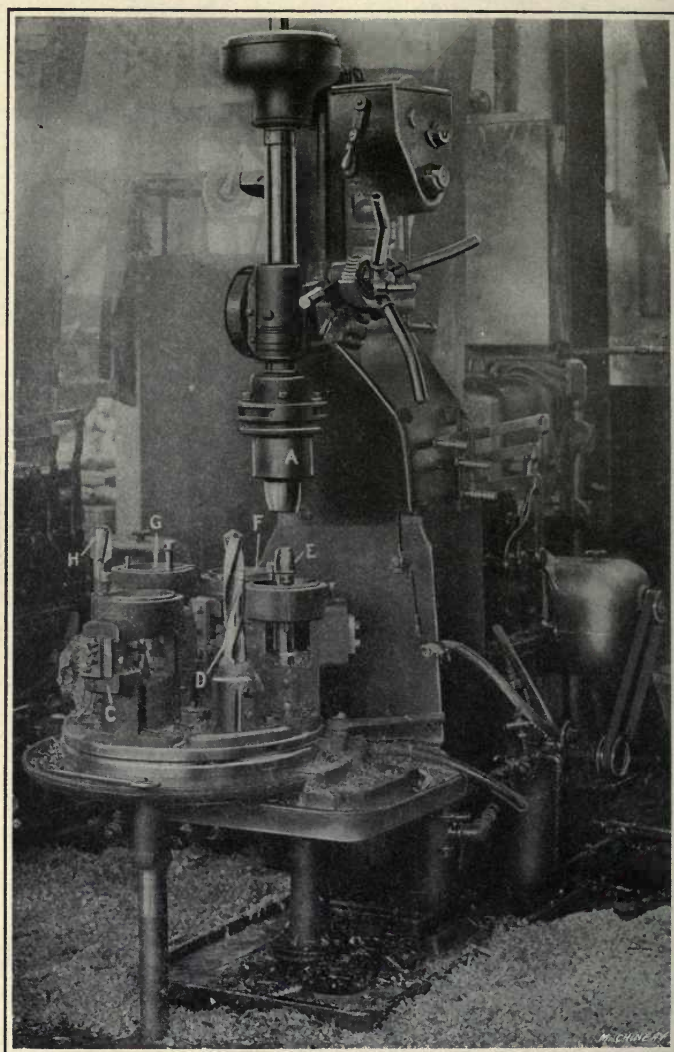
Machining Hole and Nose of Shell Blank in Barnes Drilling Machine
